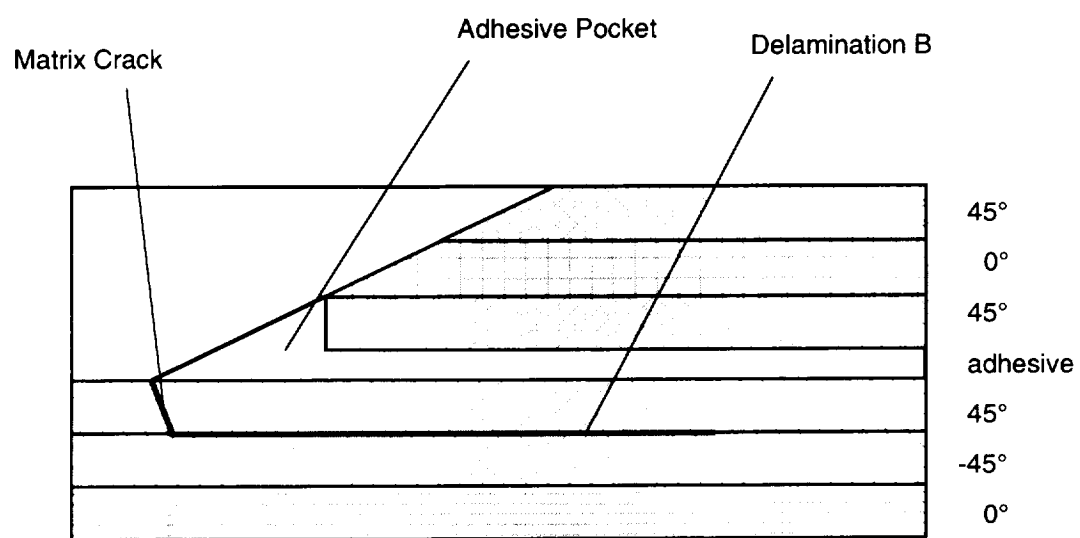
Typical damage patterns at specimen corners 2 and 3 [10]
